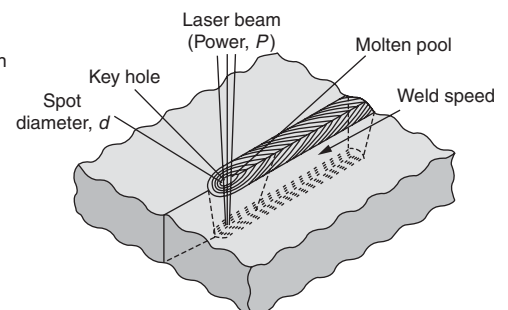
Schematic of weld region from penetration laser welding
